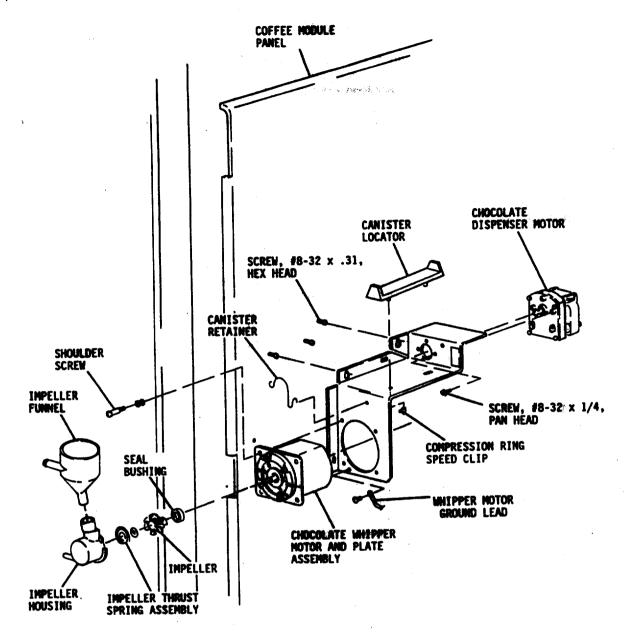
Assembly of Hot Chocolate Shelf Module
